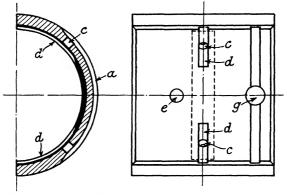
A.E.C. REAR CRANKSHAFT BEARING (No. 7)
